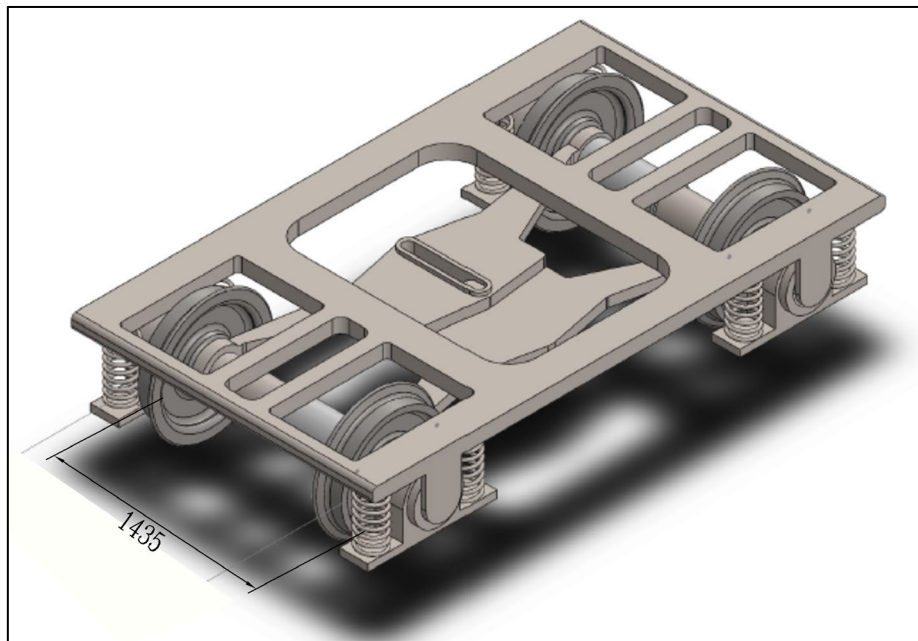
Full isometric view of Gauge-Changing Bogie for Standard Gauge System
